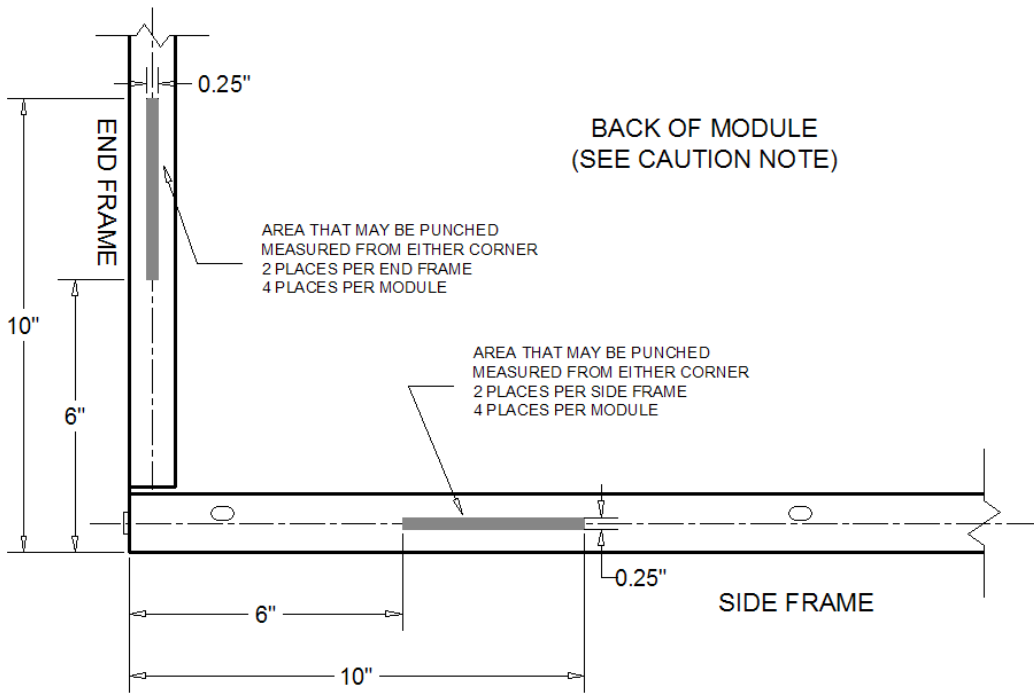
Acceptable Locations for Punching the Bottom (Back) Flange
